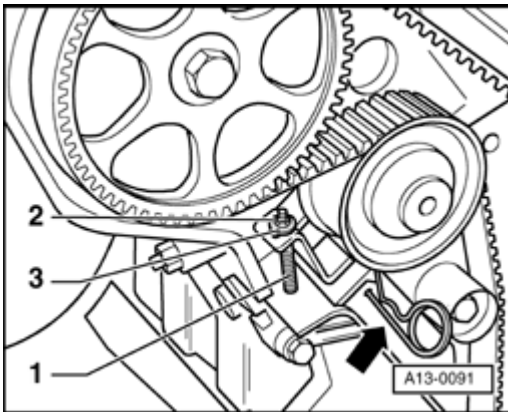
Screwing Stud Into Toothed Belt Tensioning Element & Hex Nut Onto Stud Using Large Washer
